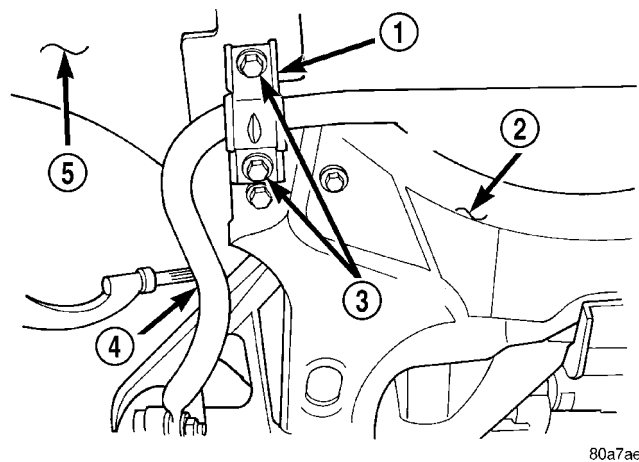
Stabilizer Bar Bushing Clamp Attachment To Vehicle
